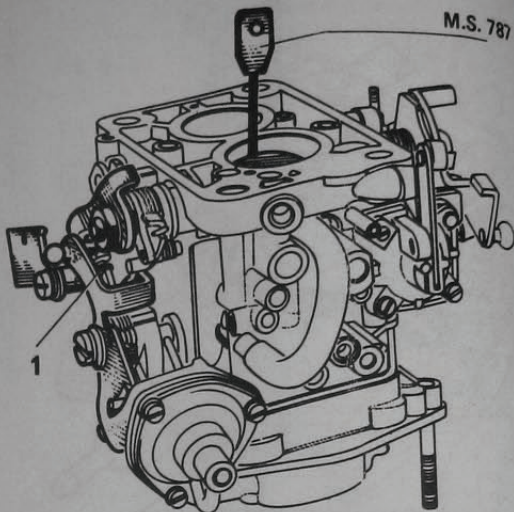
Initial throttle opening adjustment - Weber carburettor (Sec 17)
